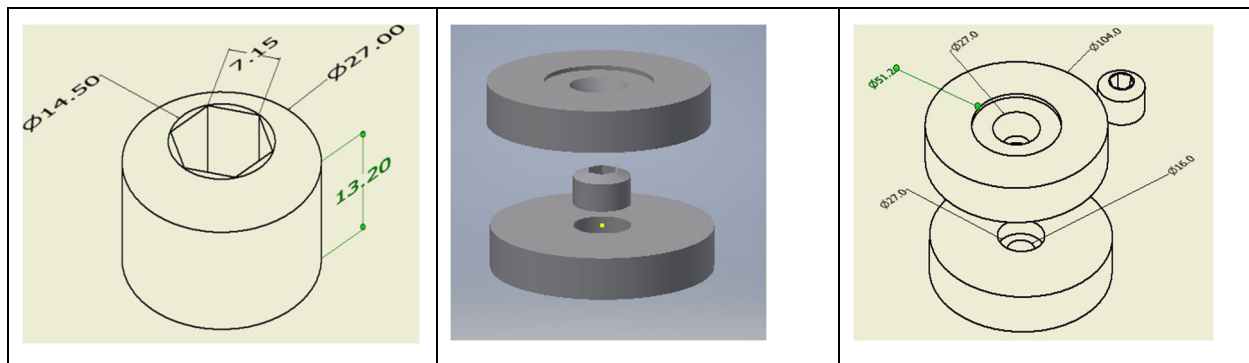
(a) HSS trim die (b) Tooling scheme (c) Dimensions of tooling (Left and right part)
